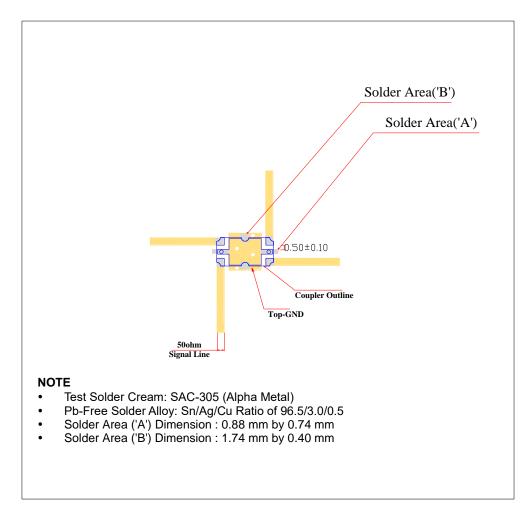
Recommended PCB Layout and Solder Mask Pattern
